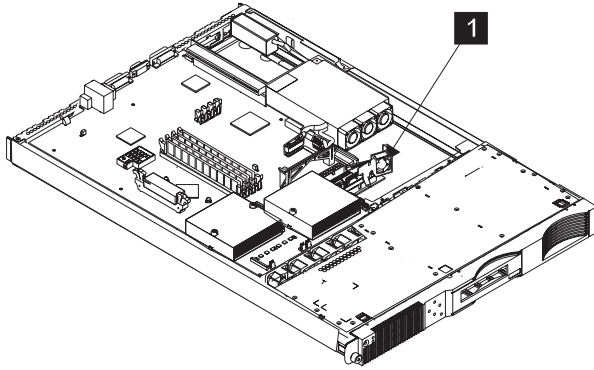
Removing a SAN Volume Controller 2145-4F2 disk drive fan
